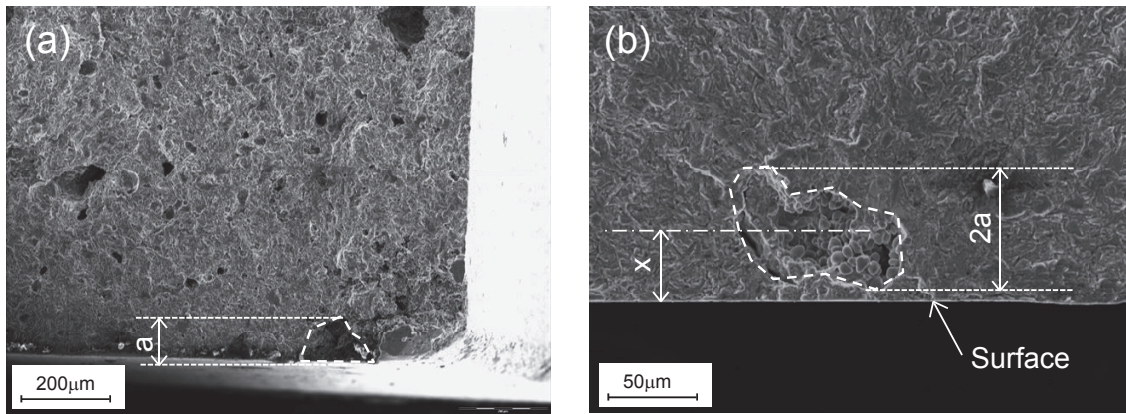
Surface defect (a) and subsurface defect (b) on fracture surfaces under bending fatigue test: (a) N20, $\sigma_a=50$ MPa, 1.5×10^6 cycles, (b) P20, $\sigma_a=75$ MPa, 1.7×10^6 cycles.
